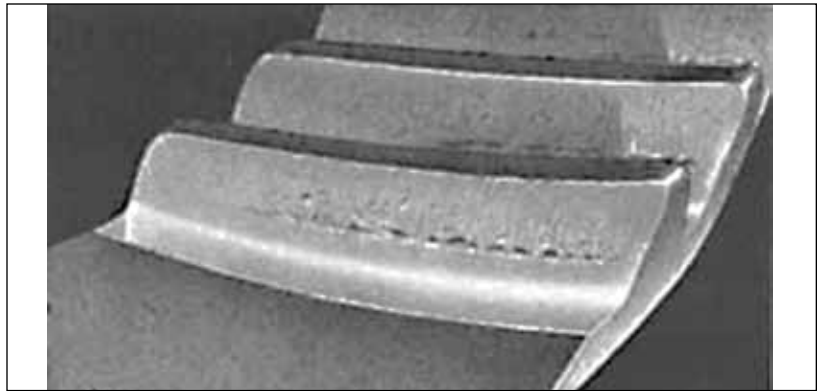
Pitch line pitting on a Zerol bevel gear surface.
